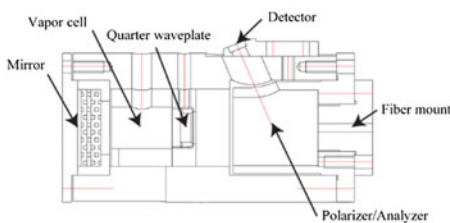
A sensor head of a magnetometer exploiting AMOR
